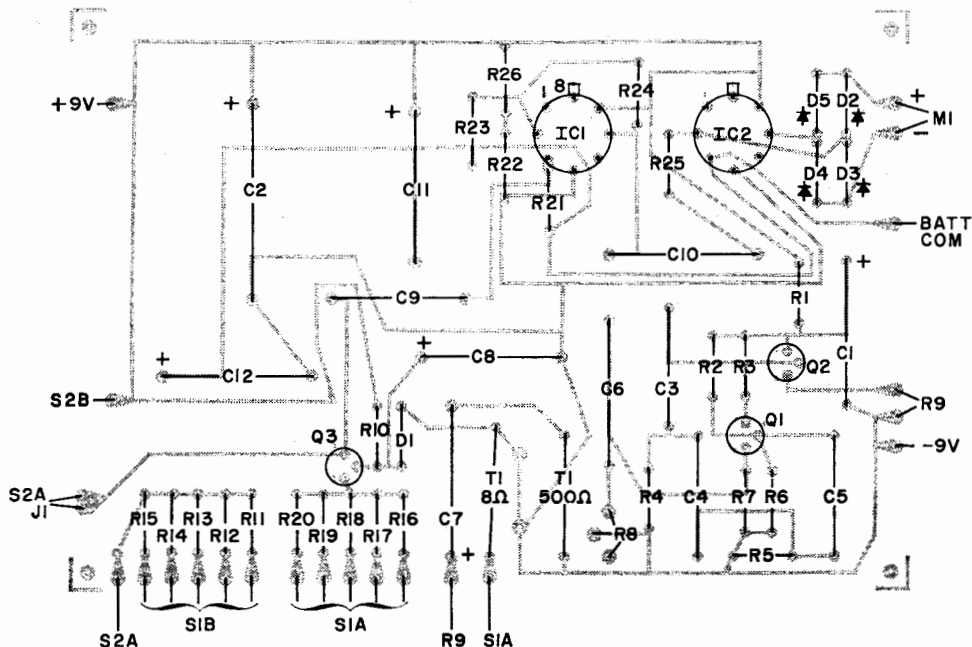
The actual size foil pattern for a PC board is shown on facing page, while component layout is above. Perf board construction may also be employed.
